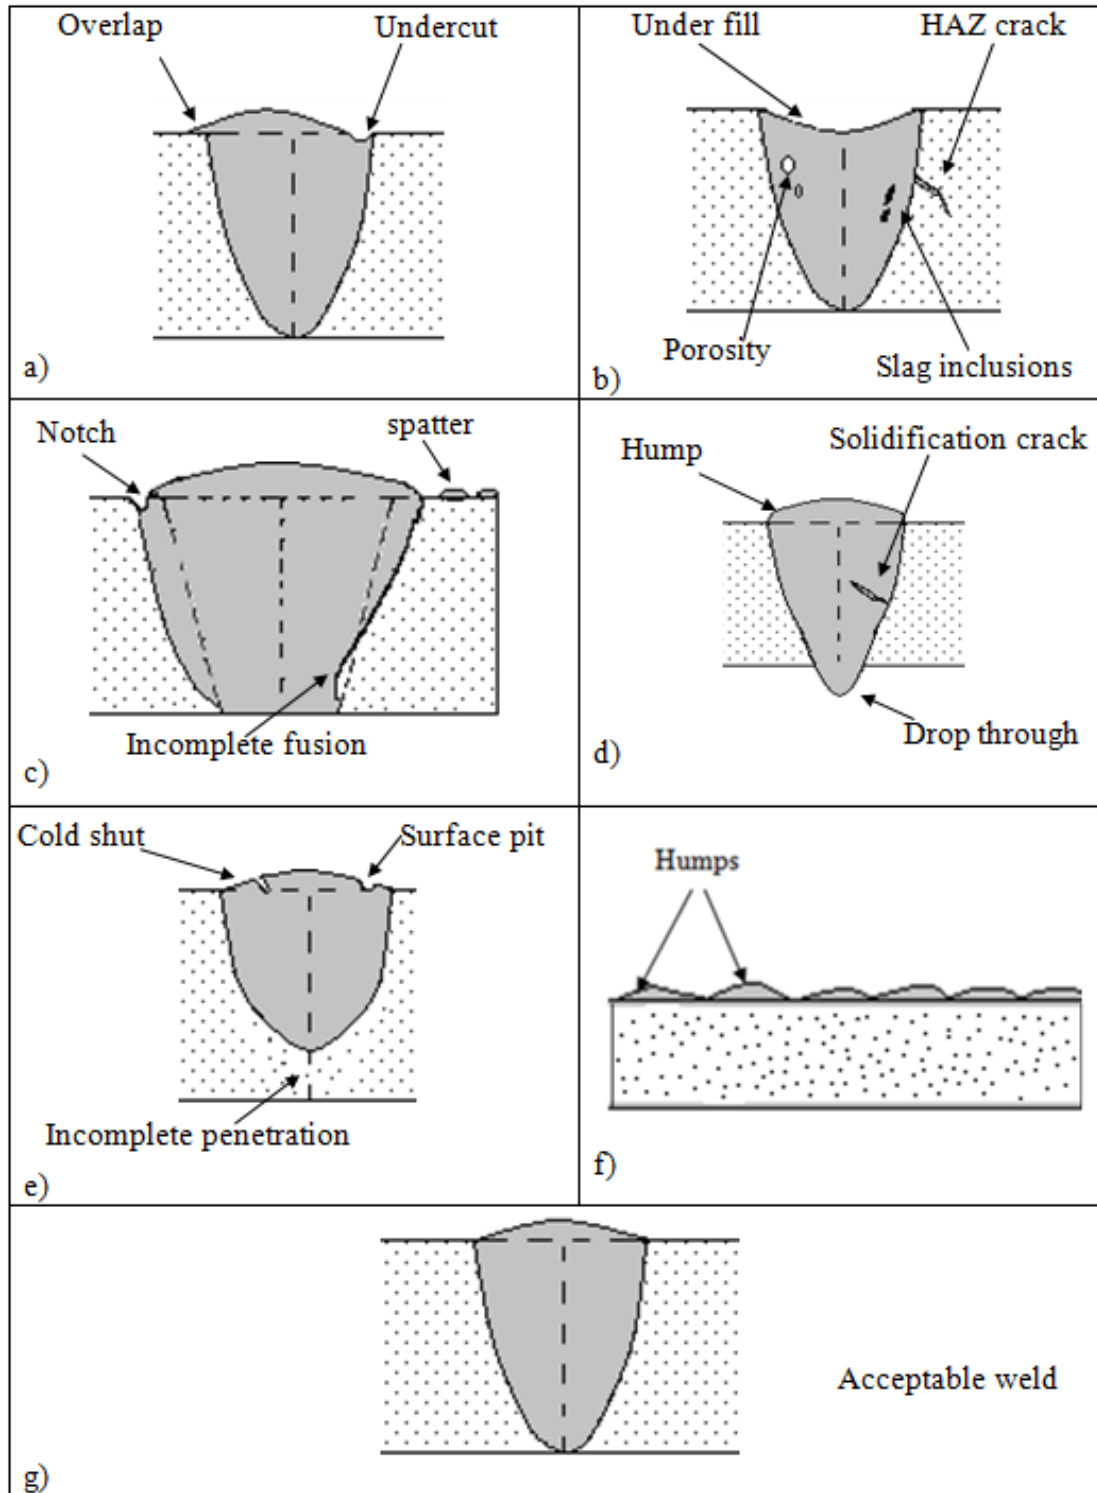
Schematic drawings of weld defects [55, 62]
